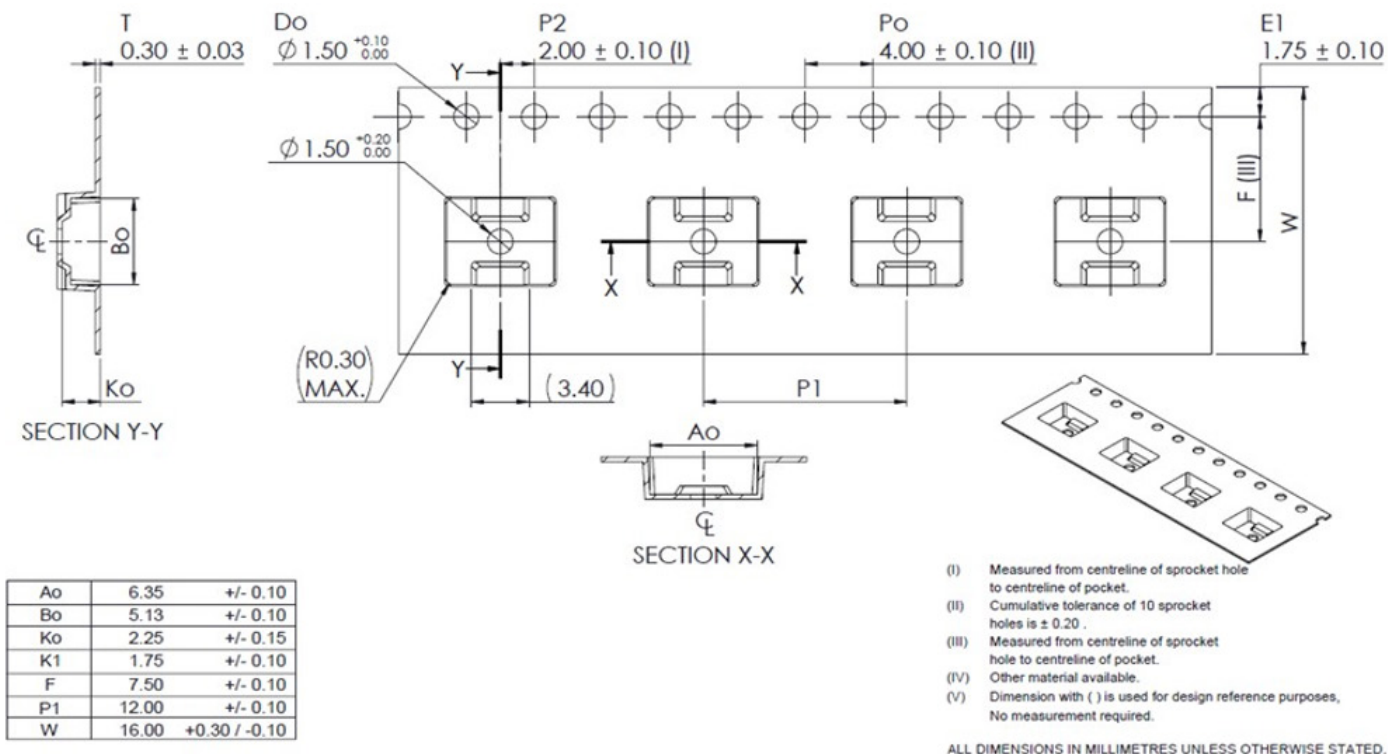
Tape and Pocket Drawing for SOIC-8 Package
